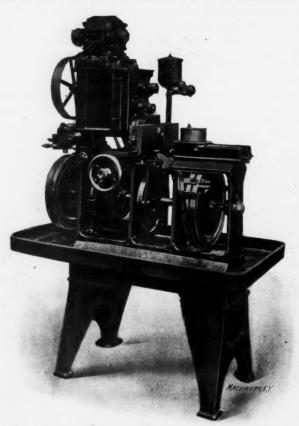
Front View of Motor-driven Automatic Screw Machine, built by the F. E. Wells & Son Co., Greenfield, Mass.
